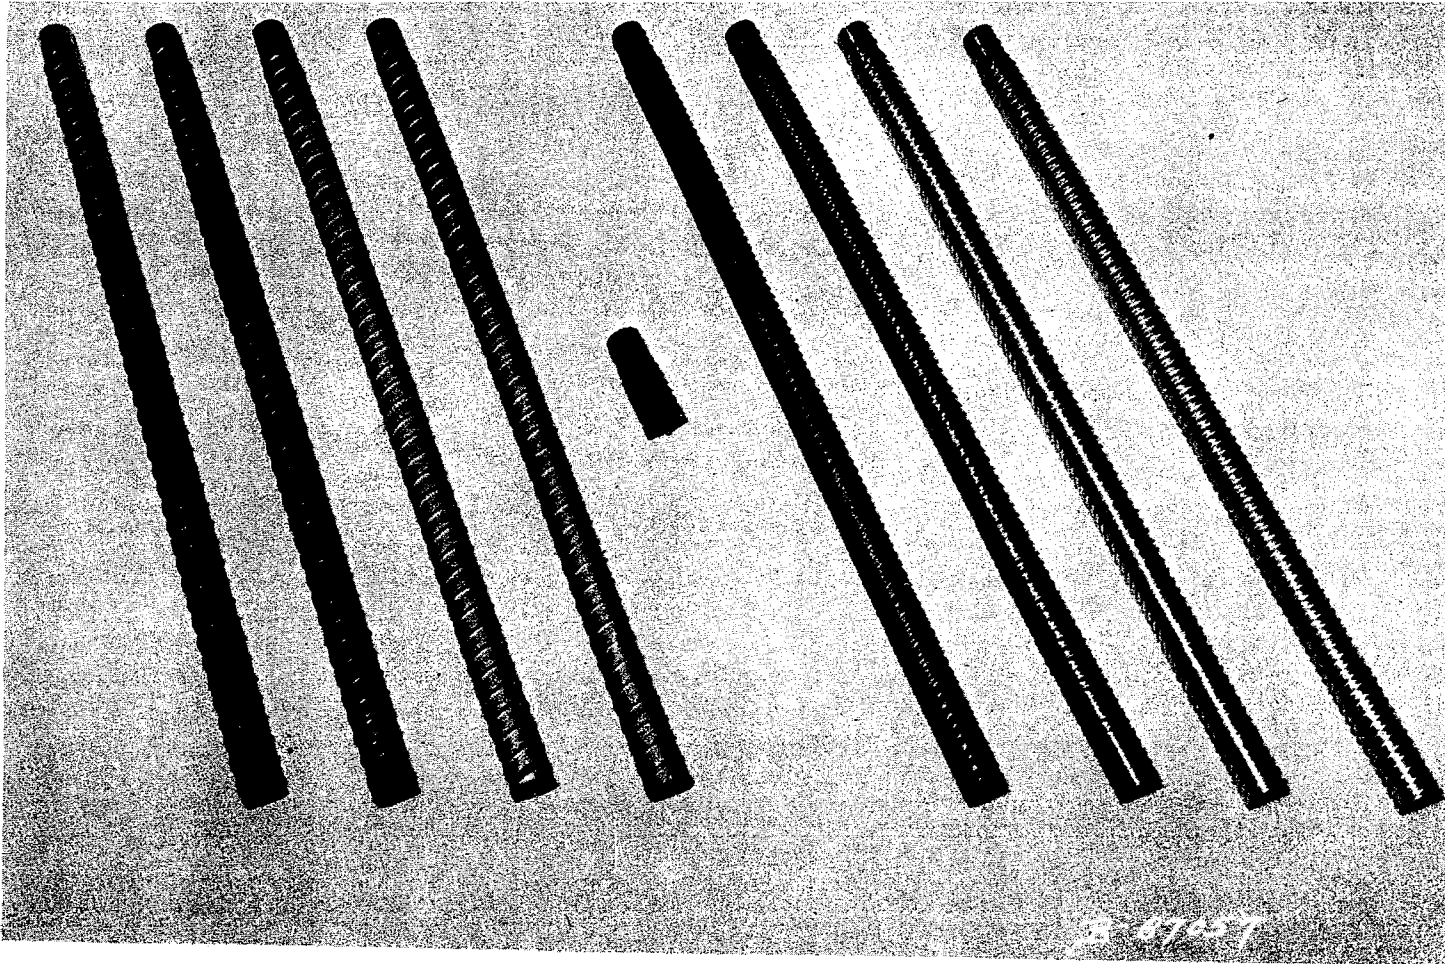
Typical Core Bit Extension Tube Test Specimens
